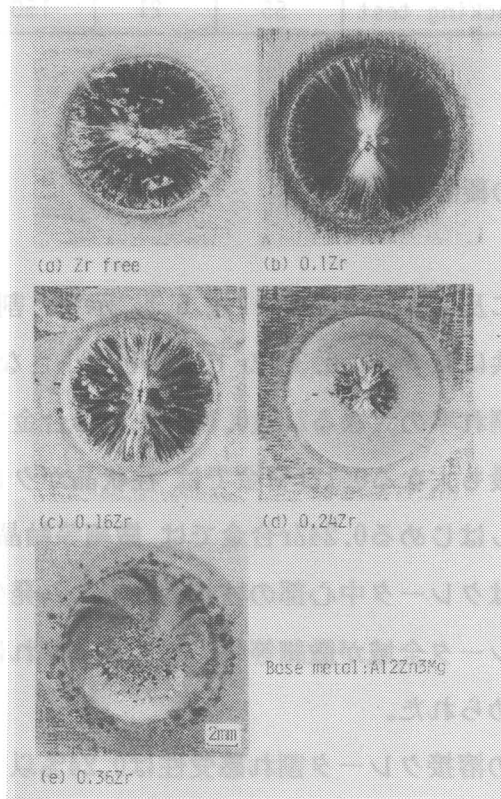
Appearance of weld crater showing macrostructure and cracking.
